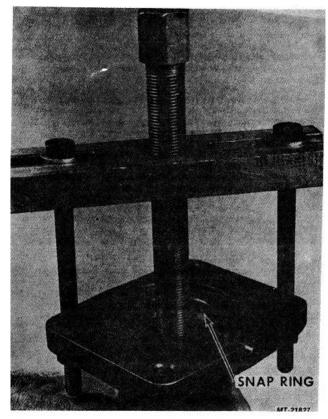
Depressing Master Cylinder Primary Piston Using a Cross Bar Type Puller
